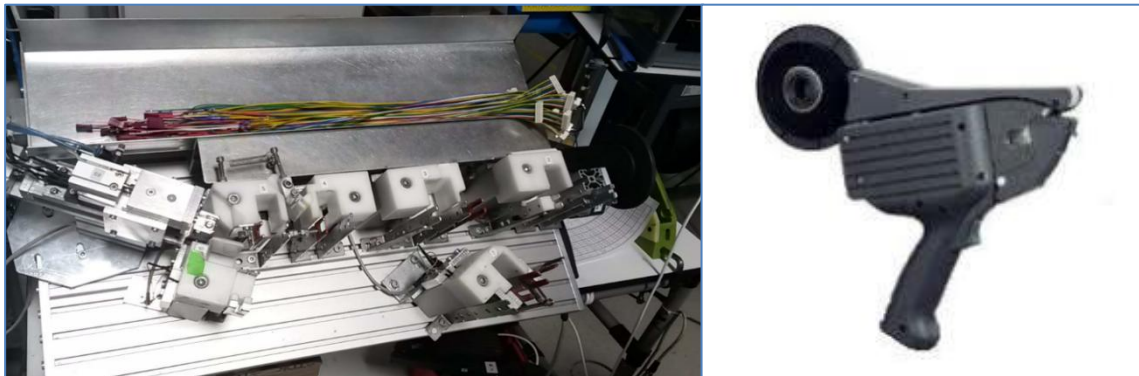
Layout of jigs (left); The spot taping gun (right)
